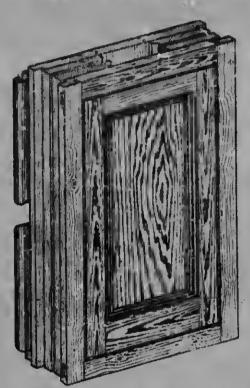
Front View of Collapsible Cupboard (Folded).
